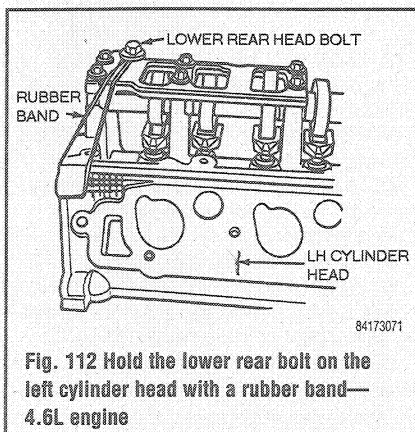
Hold the lower rear bolt on the left cylinder head with a rubber band—4.6L engine
